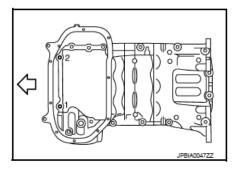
Oil Pan Mounting Bolts Tightening Sequence (Upper) Courtesy of NISSAN MOTOR CO., U.S.A.
